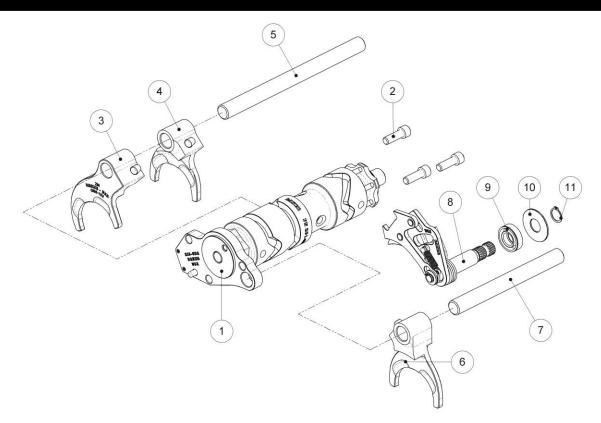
| EXPLODED VIEW, SHIFT SYSTEM
